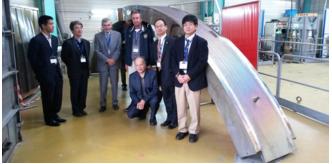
With SDMS's CEO in front of the OIS02 U-shape body after EB welding
